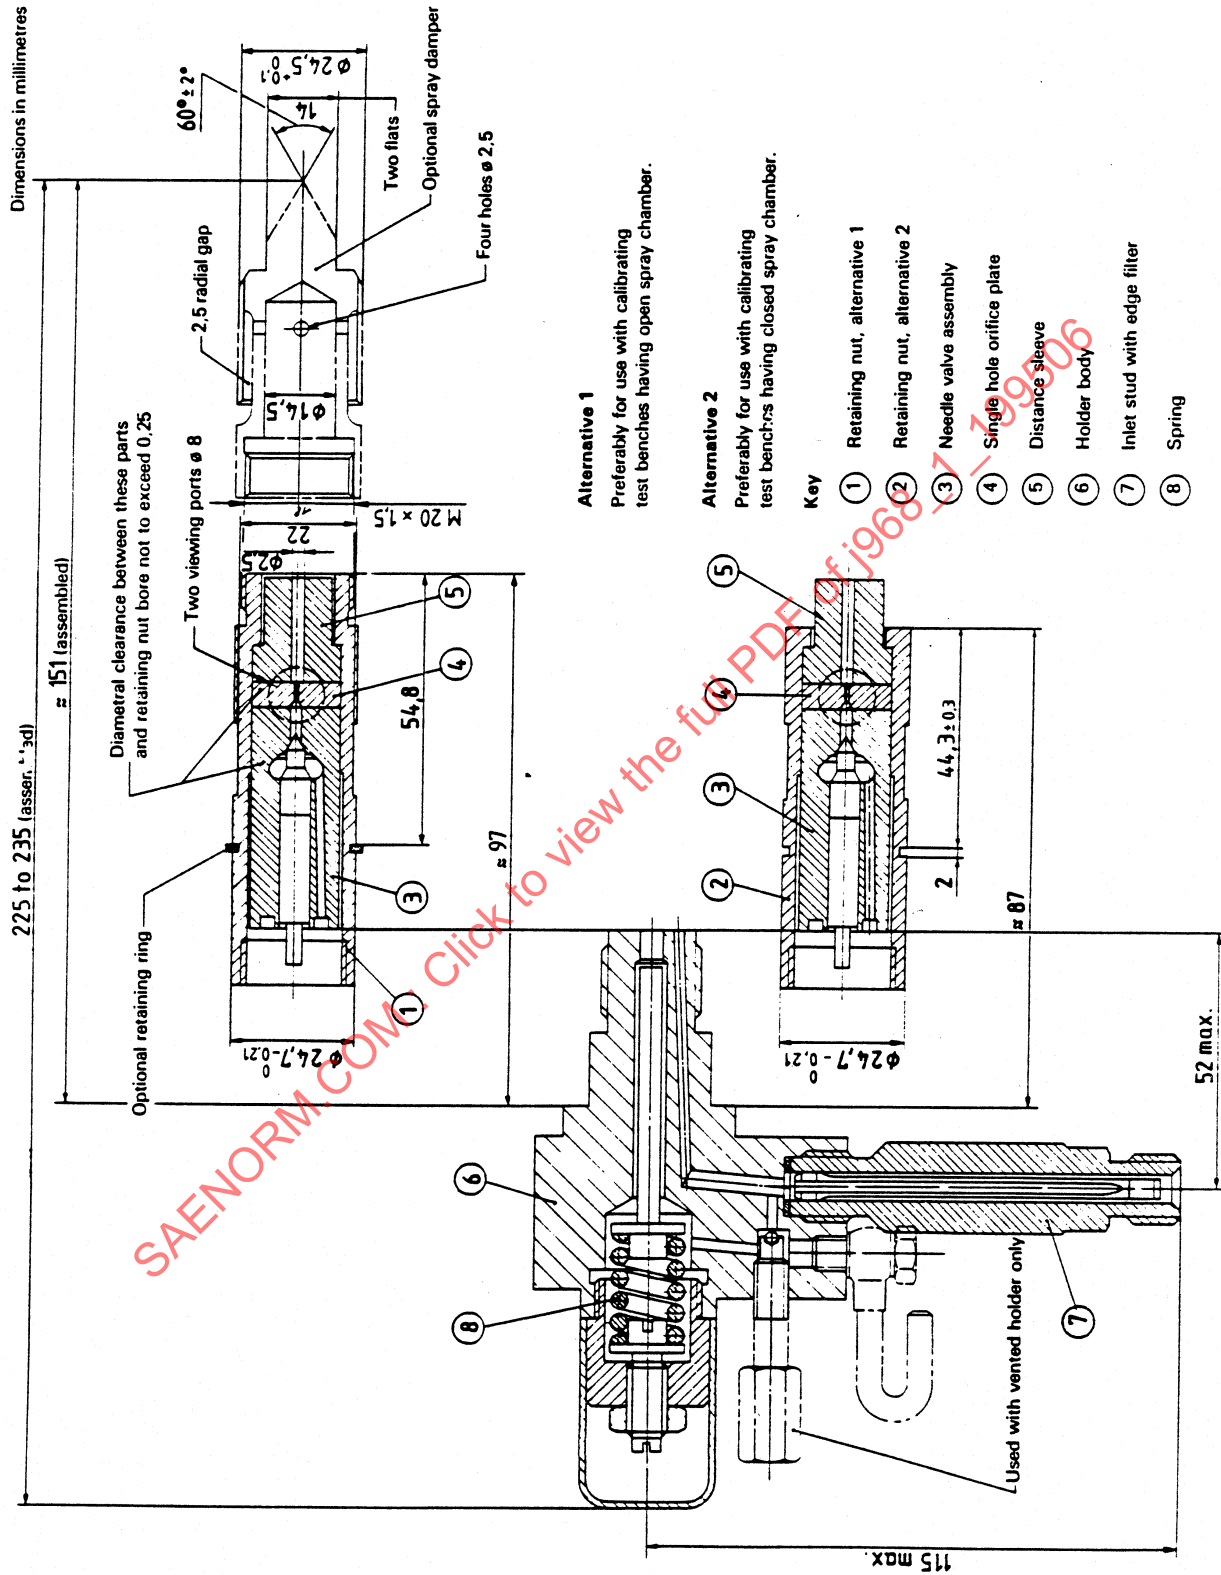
CALIBRATING NOZZLE AND HOLDER ASSEMBLY WITH SINGLE HOLE ORIFICE PLATE
